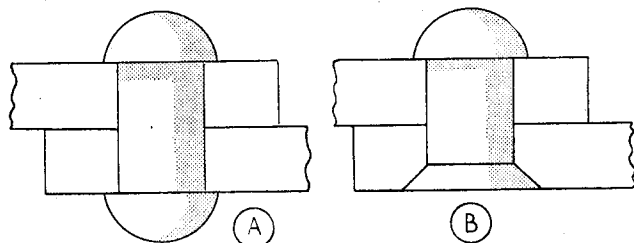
"A"—round-head rivet finished with a round head; "B"—similar—rivet clinched with countersunk head
